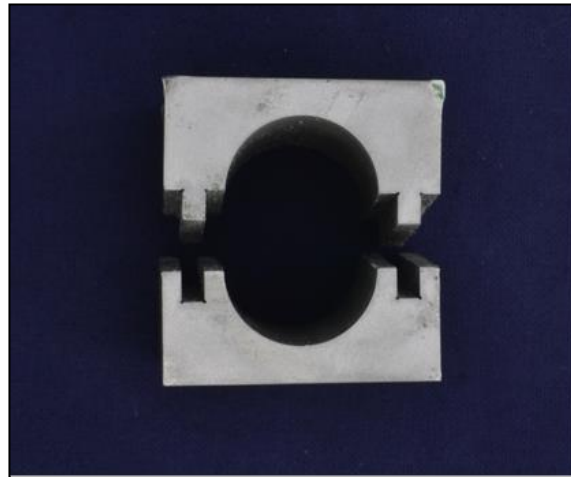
TWO - PIECE STAINLESS STEEL METAL MOLD WITH KEY AND KEYWAY MECHANISM.
